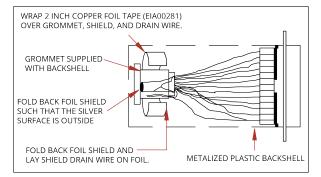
C22504 Cable (ETM-FL-15DU-9DU)
